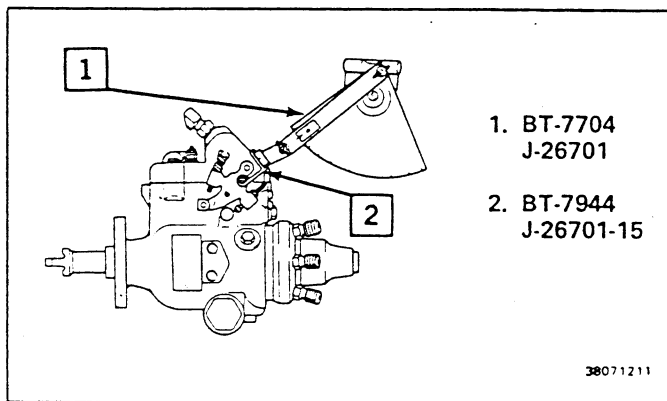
C5-8 Vacuum Regulator Valve Adjustment
